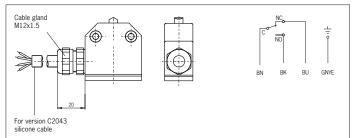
Dimension drawing/connection diagram for N01.550X... with connecting cable (PUR cable,  $4 \times 0.5 \text{ mm}^2$ )
